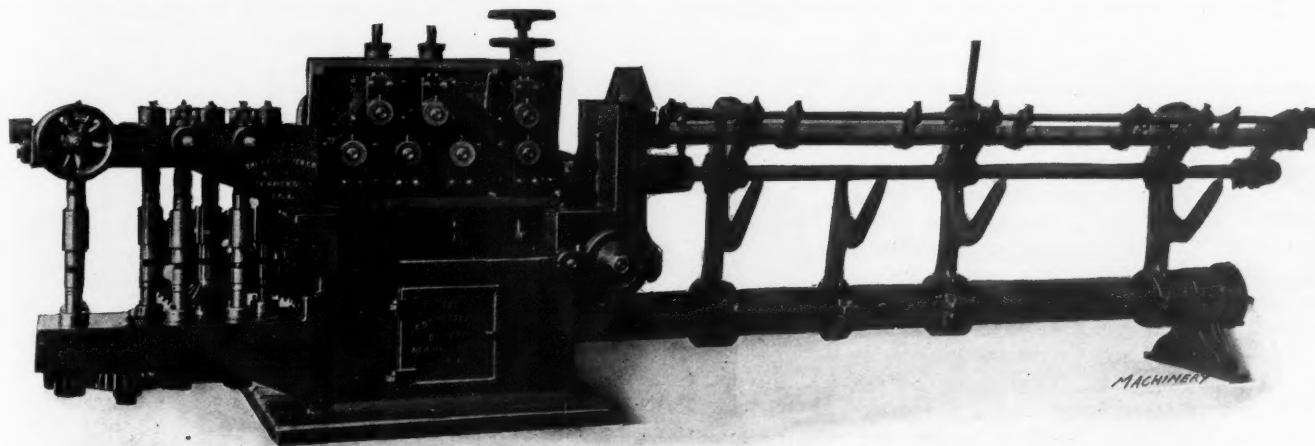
Shuster No. 17 Straightening and Cutting-off Machine for Square, Hexagonal or Round Stock
